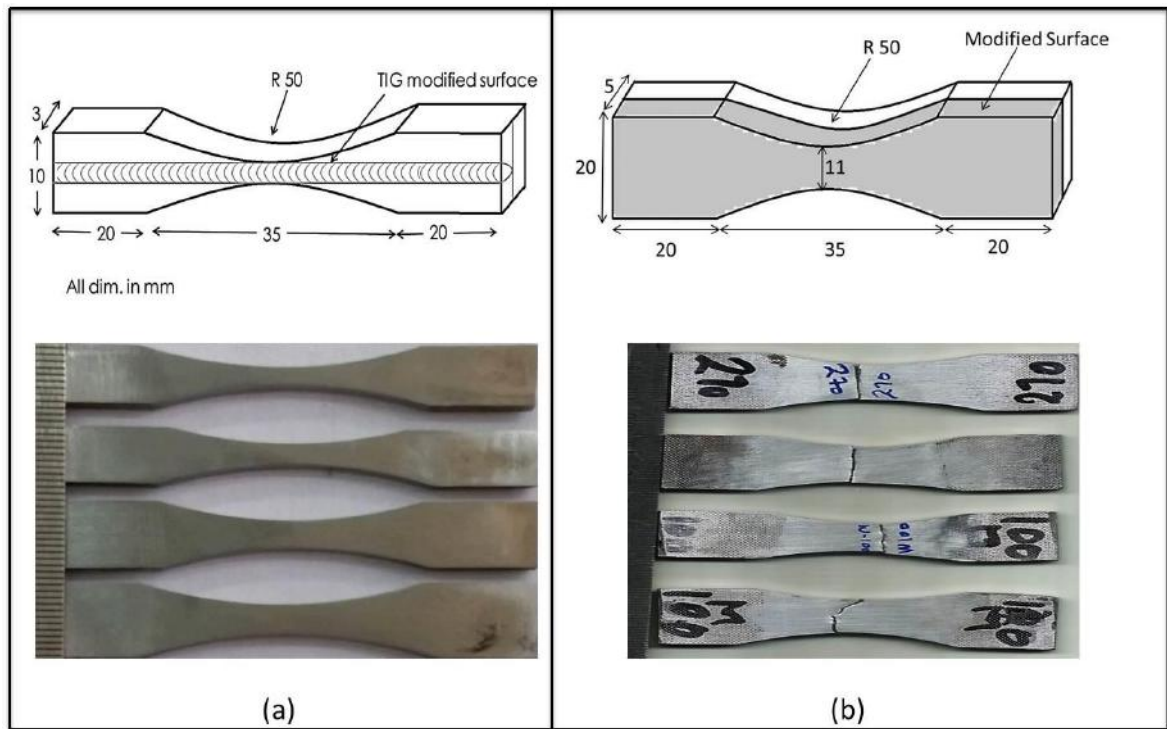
Schematic view and typical appearance of tensile fatigue test sample for a) Single-pass surface modification b) multi-pass surface modification.
